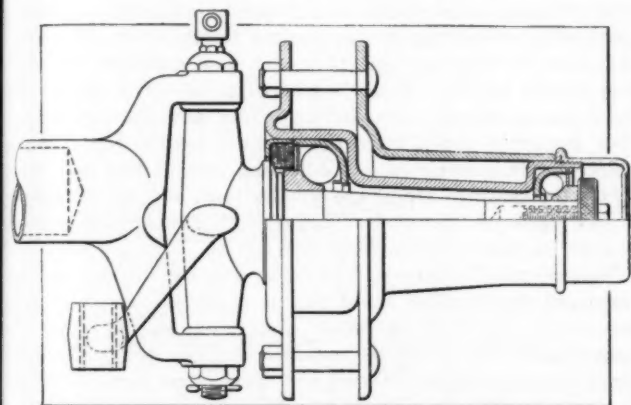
Front wheel hub with cup and cone ball bearings, felt closure, and cap screw replacing a hub nut
